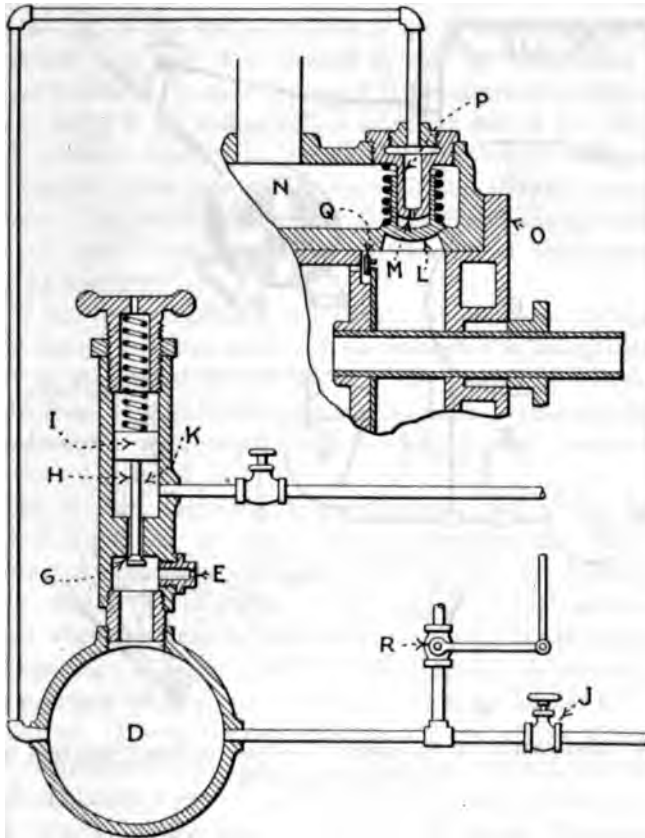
APPLICATION OF THE REGULATOR TO THE REGULATION OF THE DISCHARGE VALVES OF A PISTON INLET TYPE COMPRESSOR
